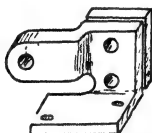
View of Fitting for Clamping and Adjusting Driving Spring
